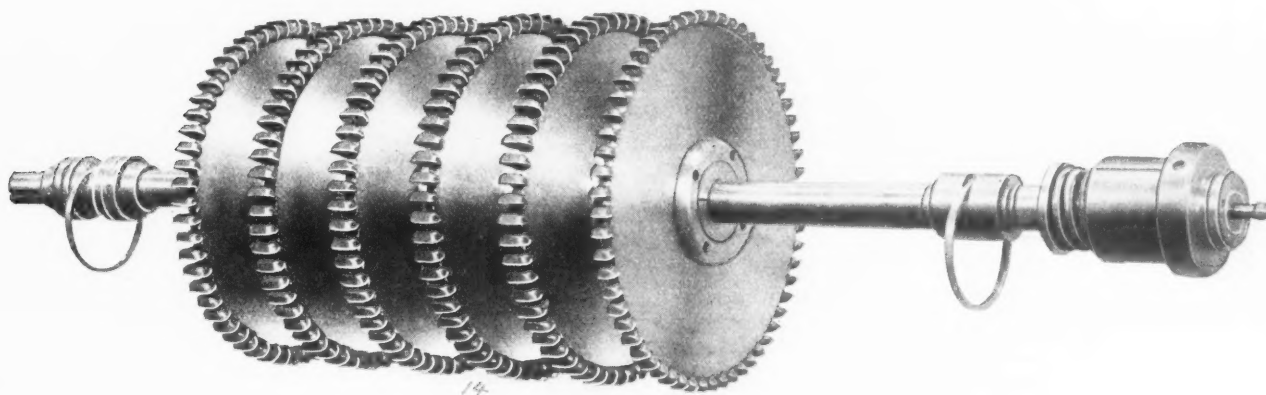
Assembled Rotor of Kerr Steam Turbine.
